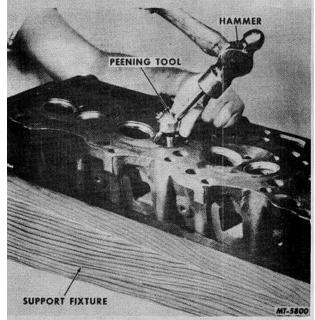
Staking Valve Seat Insert in Cylinder Head with Peening Tool
